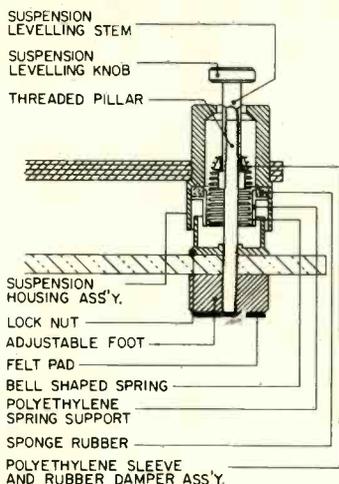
Cut-away side view of one suspension tower, showing detail of spring mounting.
